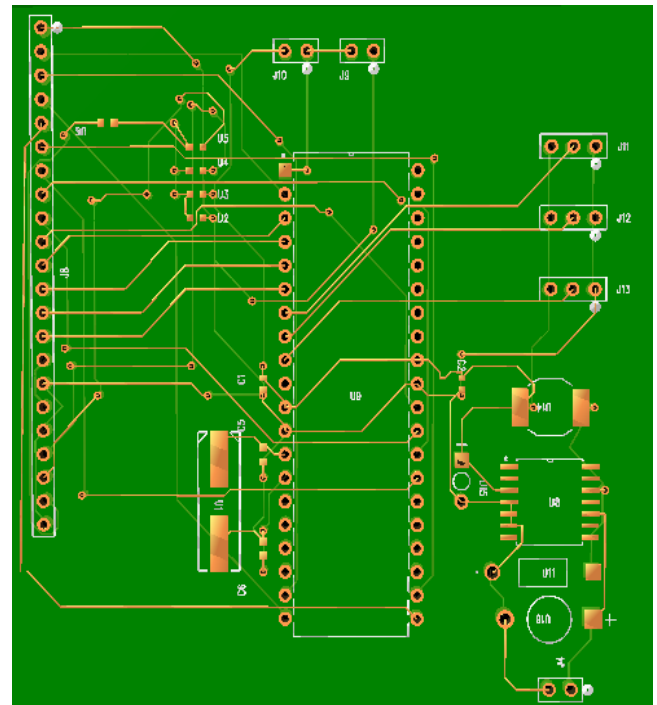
PCB for the PIC18F4550 with LCD, gas pedal, seat detector and seat buckle connectors.
